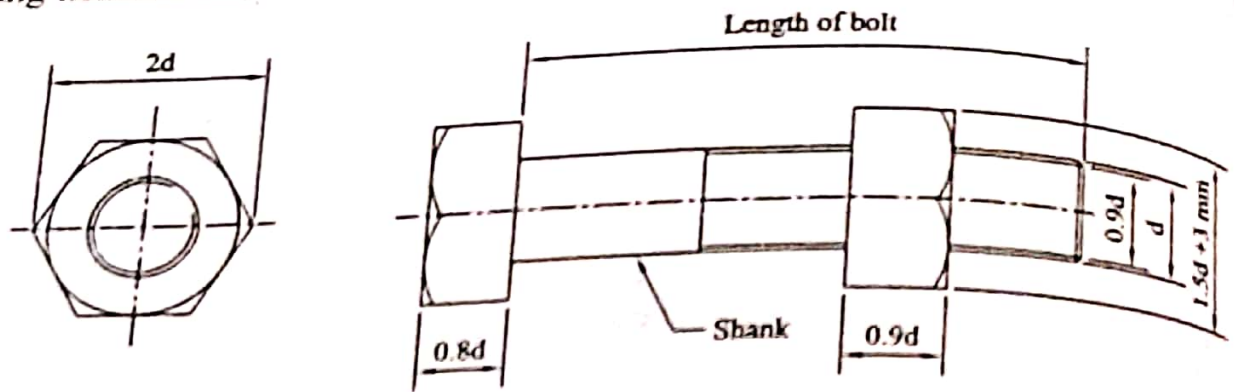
Front and side view of a hexagonal headed bolt across corners
